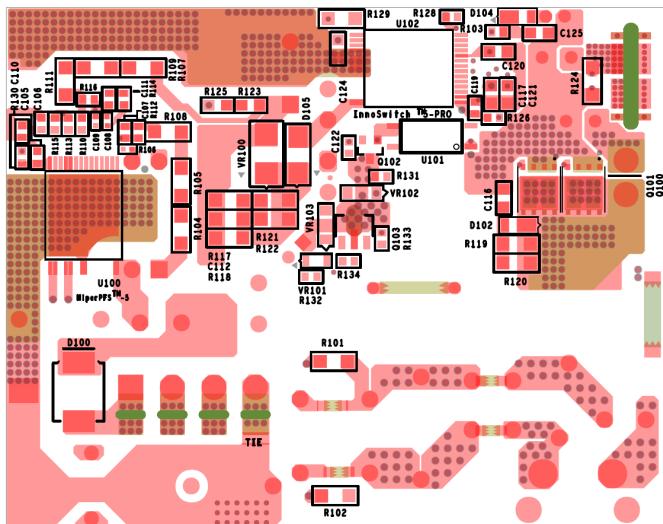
Main Board Printed Circuit Layout, Inner 1.
